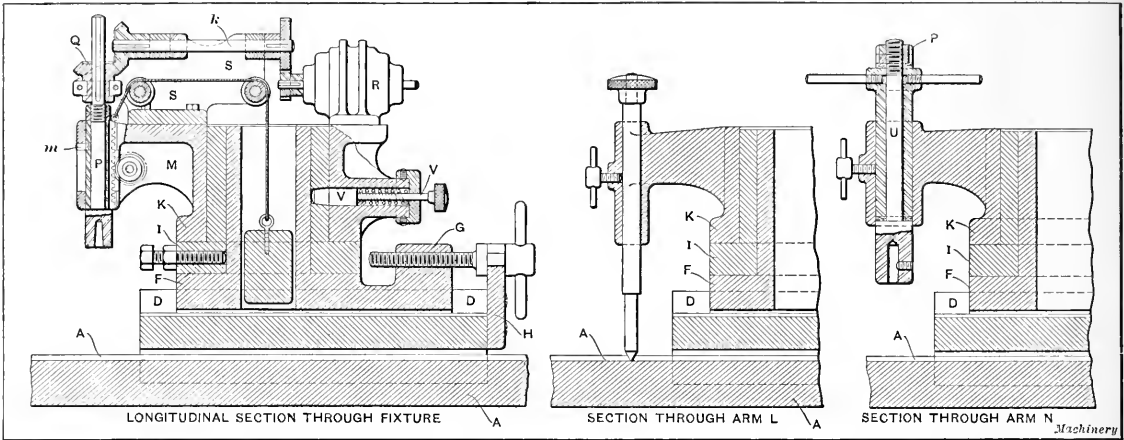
Longitudinal Cross-sectional View of Drilling and Tapping Fixture and Cross-sectional Views of Arms L and N
